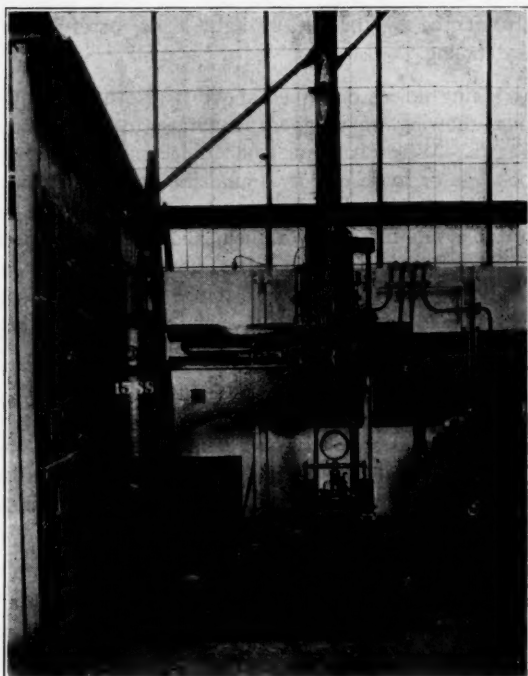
BRINELL HEAD MOUNTED ON RADIAL DRILL ARM
